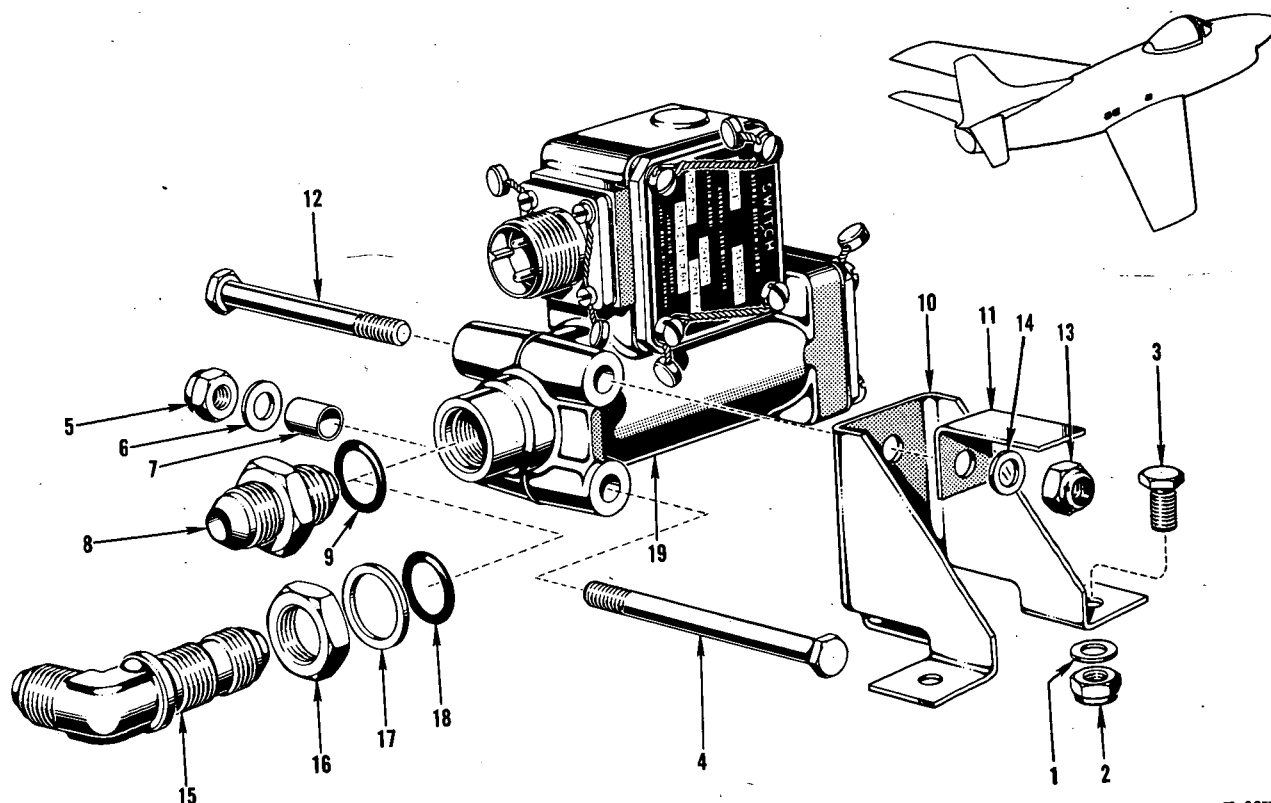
AFT WING CENTER SECTION HYDRAULIC PRESSURE SWITCH ASSEMBLIES
